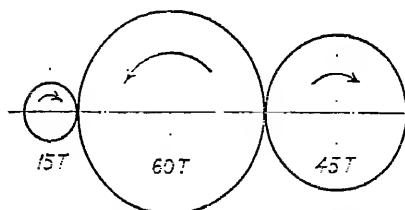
Driver and driven members rotate in the same direction in simple gear trains with an odd number of intermediate gears.
